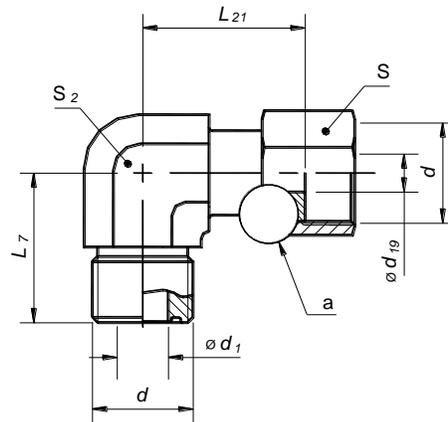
SWIVEL 90 DEGREE ELBOW
